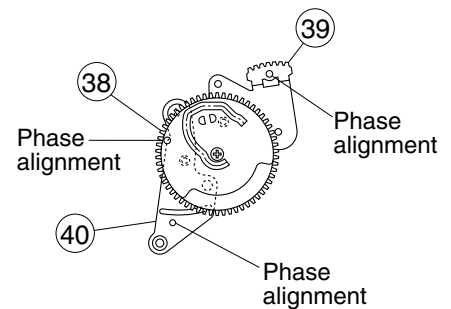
(b) Removing the Clutch Lock Lever Assembly ④⑩
